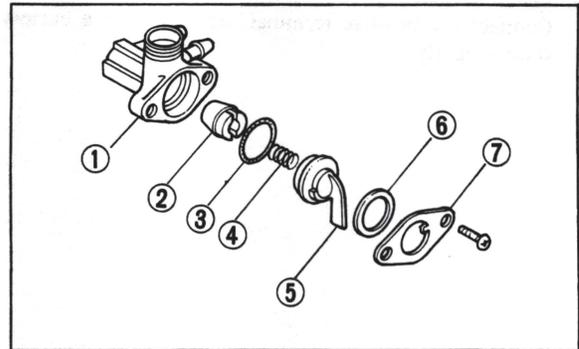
(1) Fuel cock body (4) Spring (7) Lever setting plate
